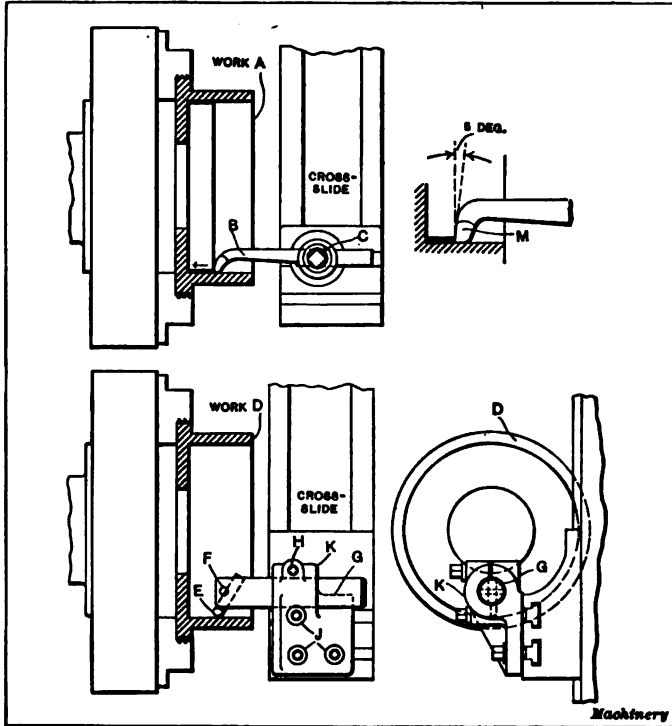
(Upper View) Forged Type of Boring Tool; (Lower View) Boring Tool with Inserted Cutter
